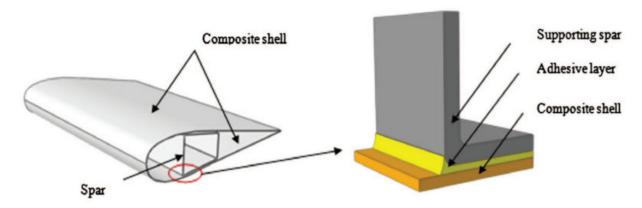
Shear web bonded to spar caps co-infused into top and bottom blade shell halves [31].
